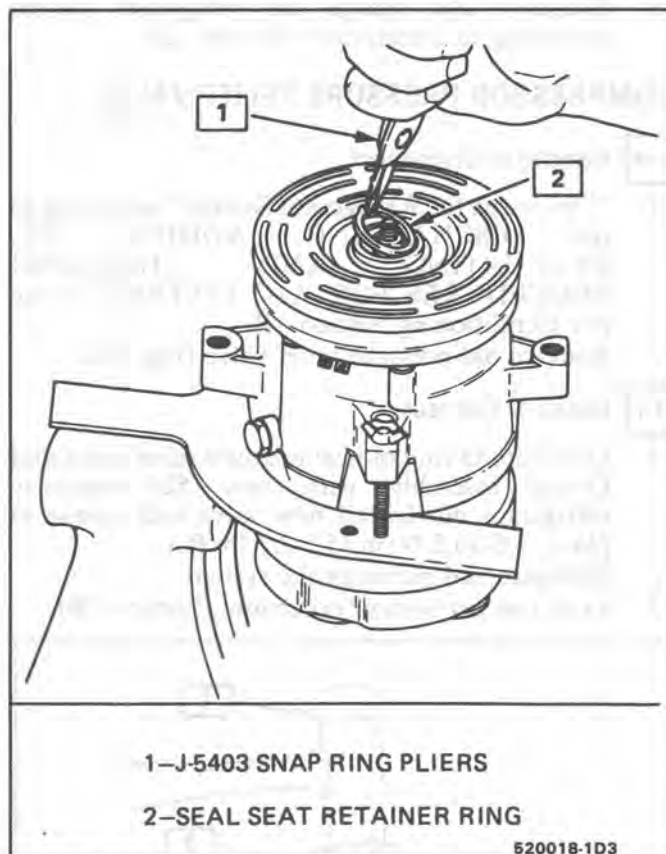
Removing or Installing Shaft Seal Seat Retaining Ring
